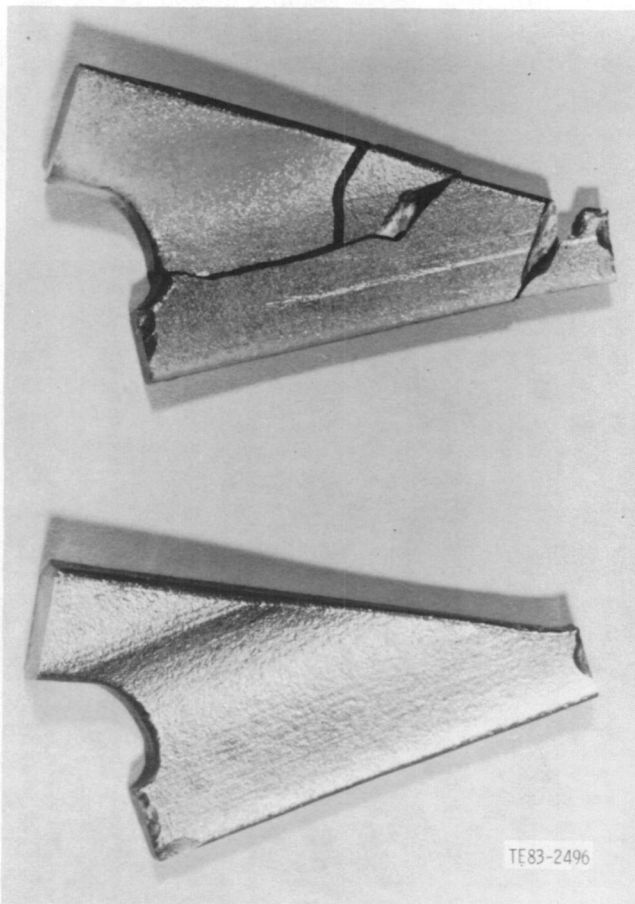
Outer vane support ring FOD segment before and after impact, turbine blade Test No. 2.
